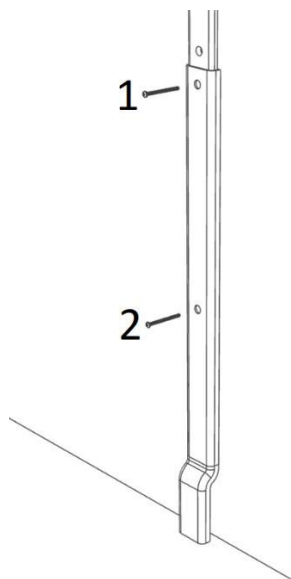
Insert Flip Toggle Screws into the Remaining Holes on the Lower Post
